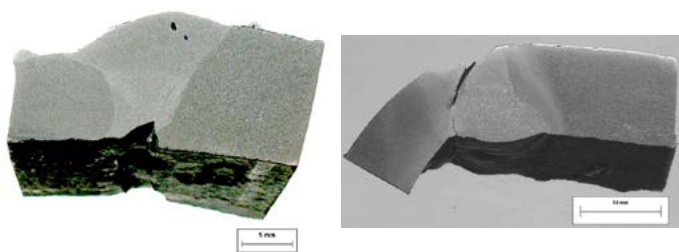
Defective girth weld between seamless pipe ( $t=12$  mm) and spirally welded pipe ( $t=8$  mm)
